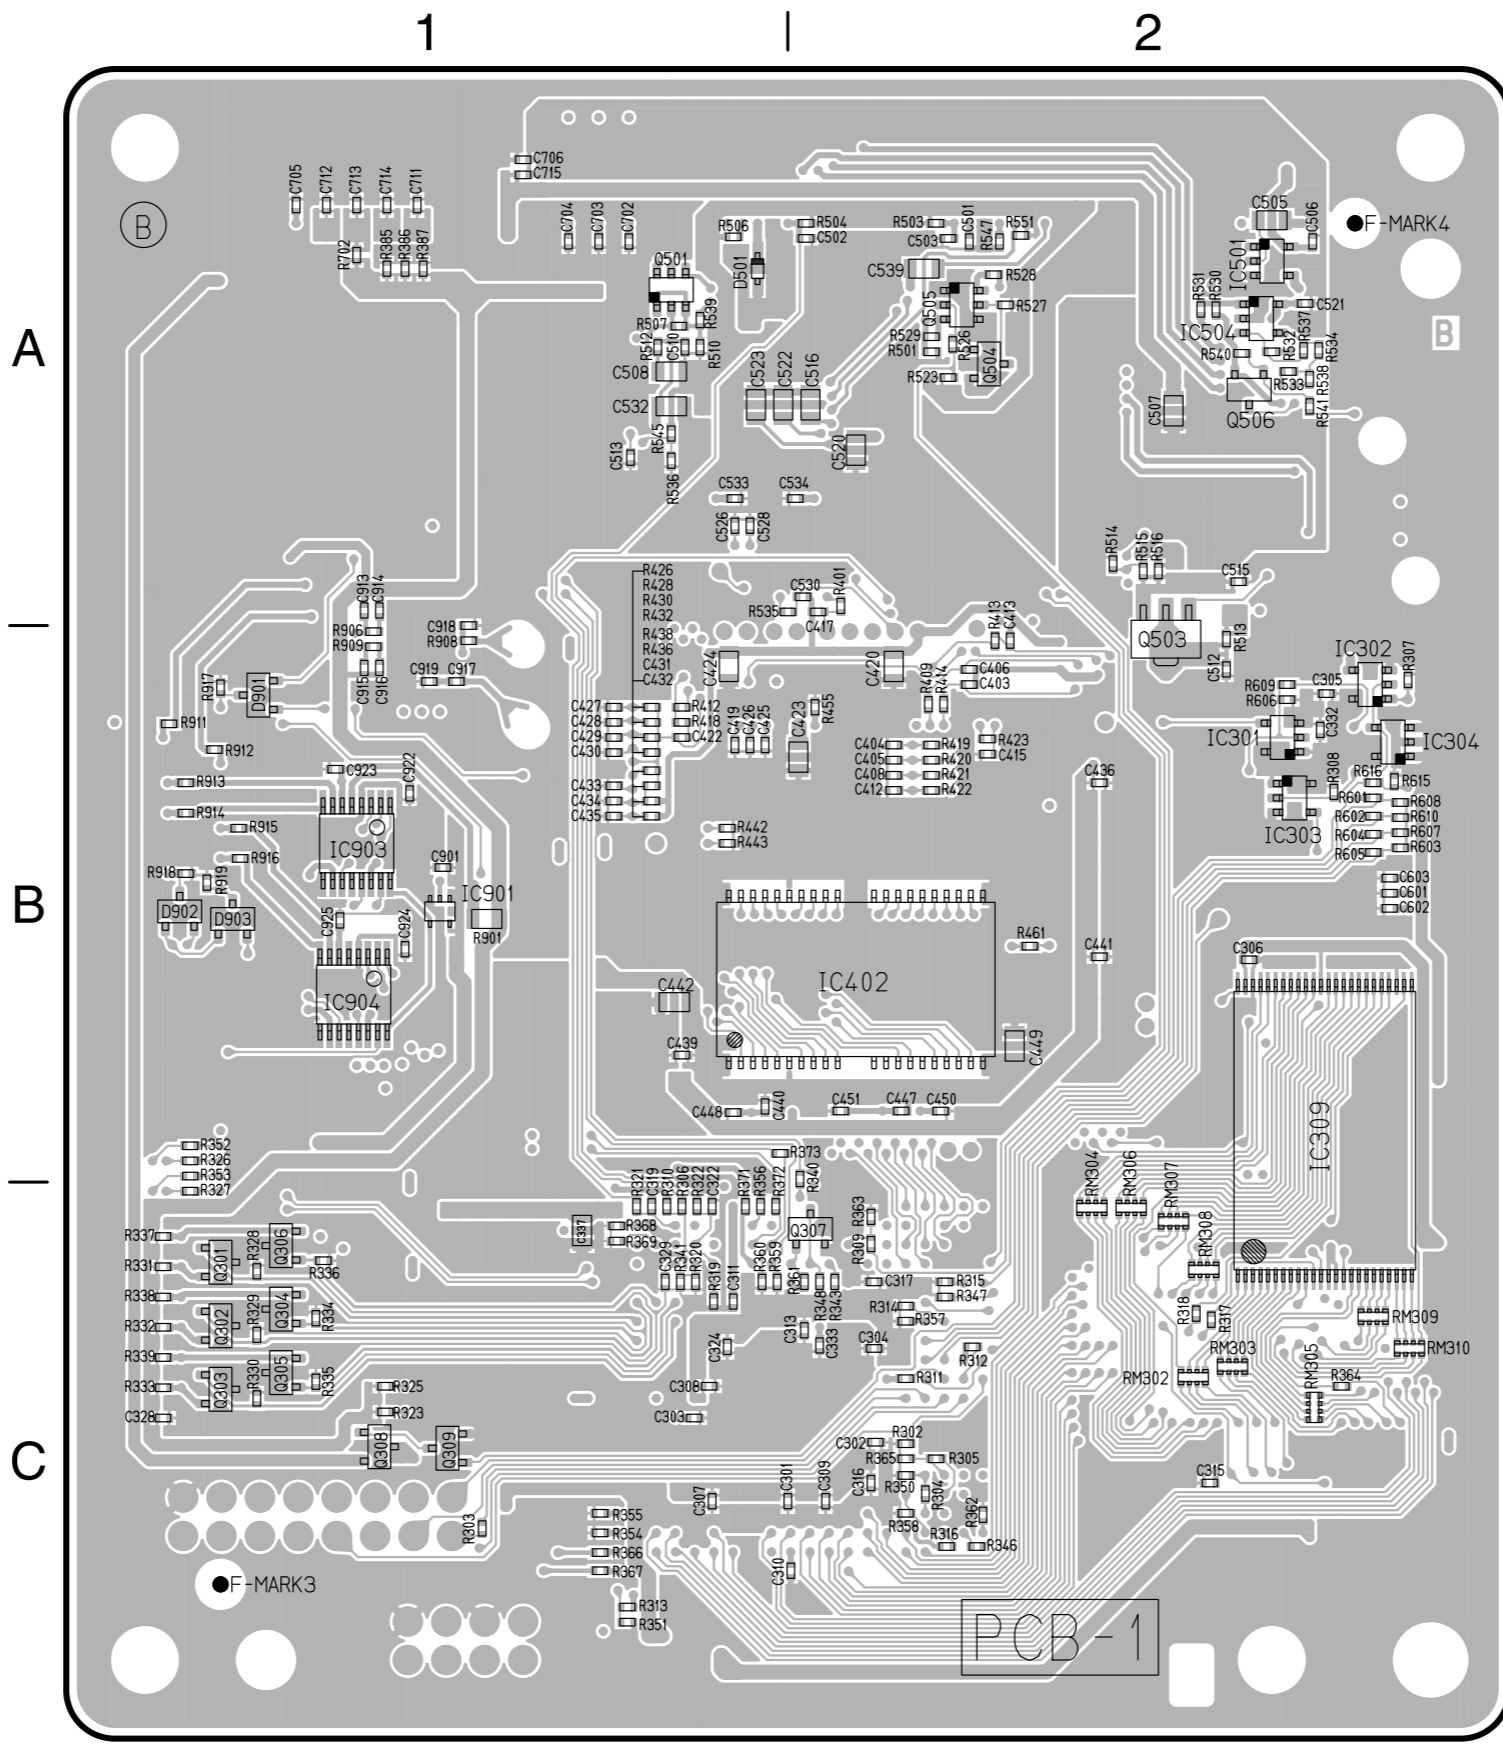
EU01 Main PC Board (Bottom pattern and bottom parts location diagram)
